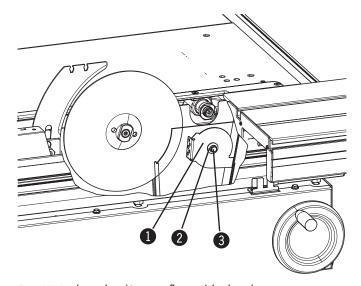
Lock washer/Scoring flange/Flat-head screw
